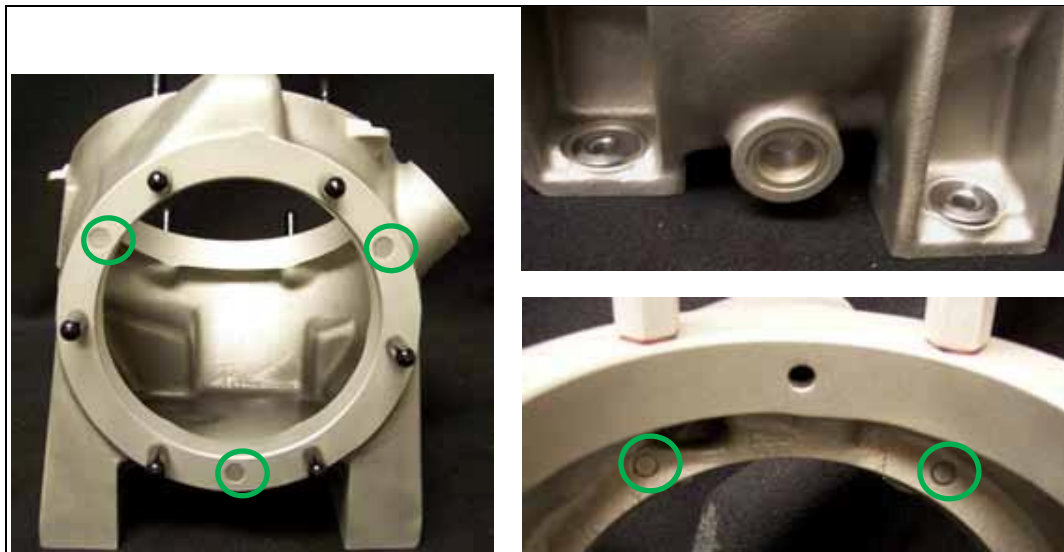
Mixed metal types on H-60 magnesium components. Left: threaded studs with black caps and machine face buttons (green). Upper right: mounting pad bushings. Lower right: bottom of studs penetrated through the as-cast surface (green).
